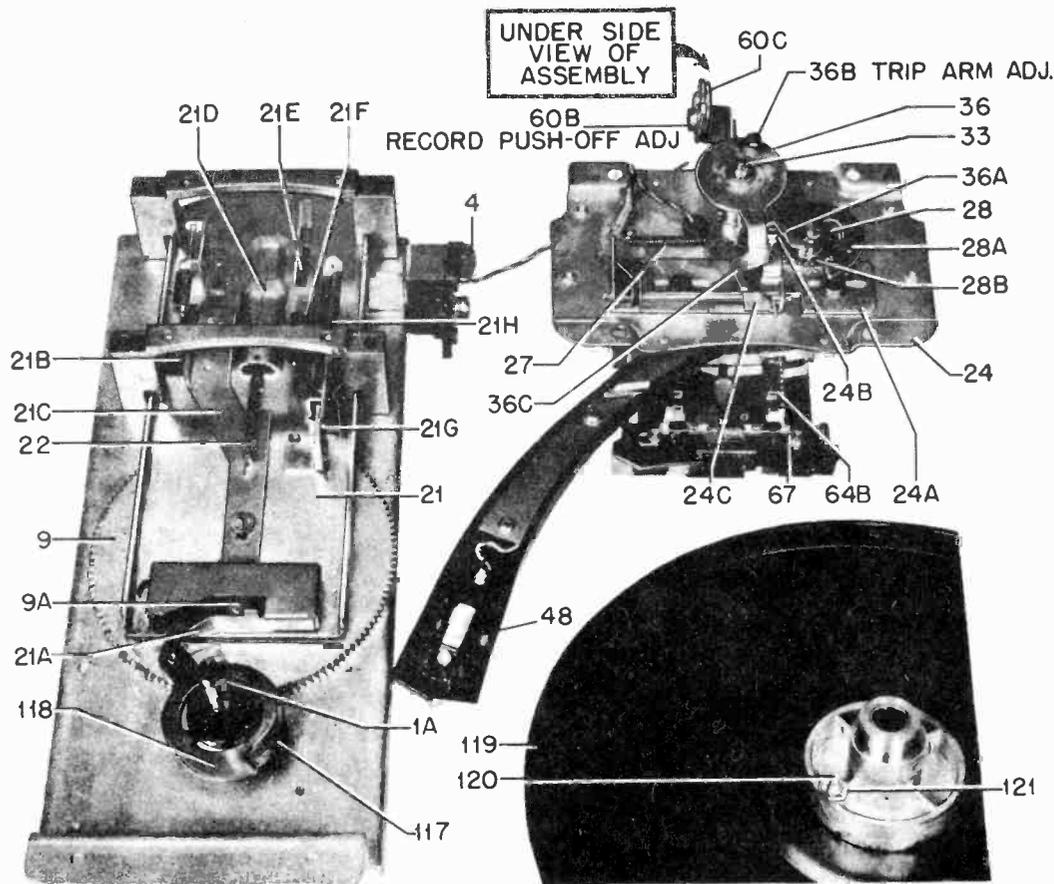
DISASSEMBLED VIEW OF RECORD CHANGER MECHANISM
